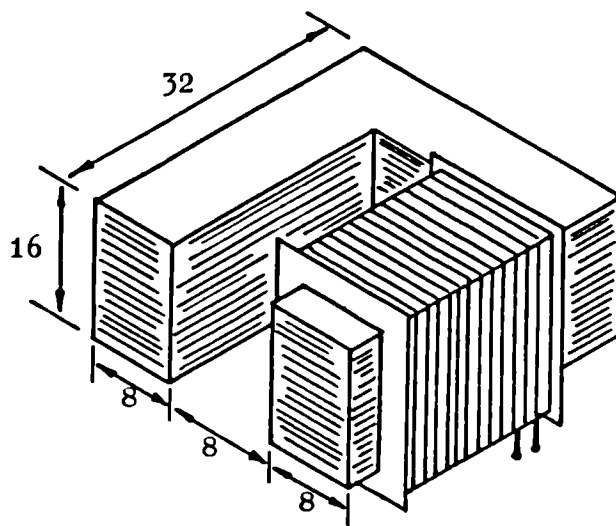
MAGNET DETAILS (DIMENSIONS IN MILLIMETRES)
